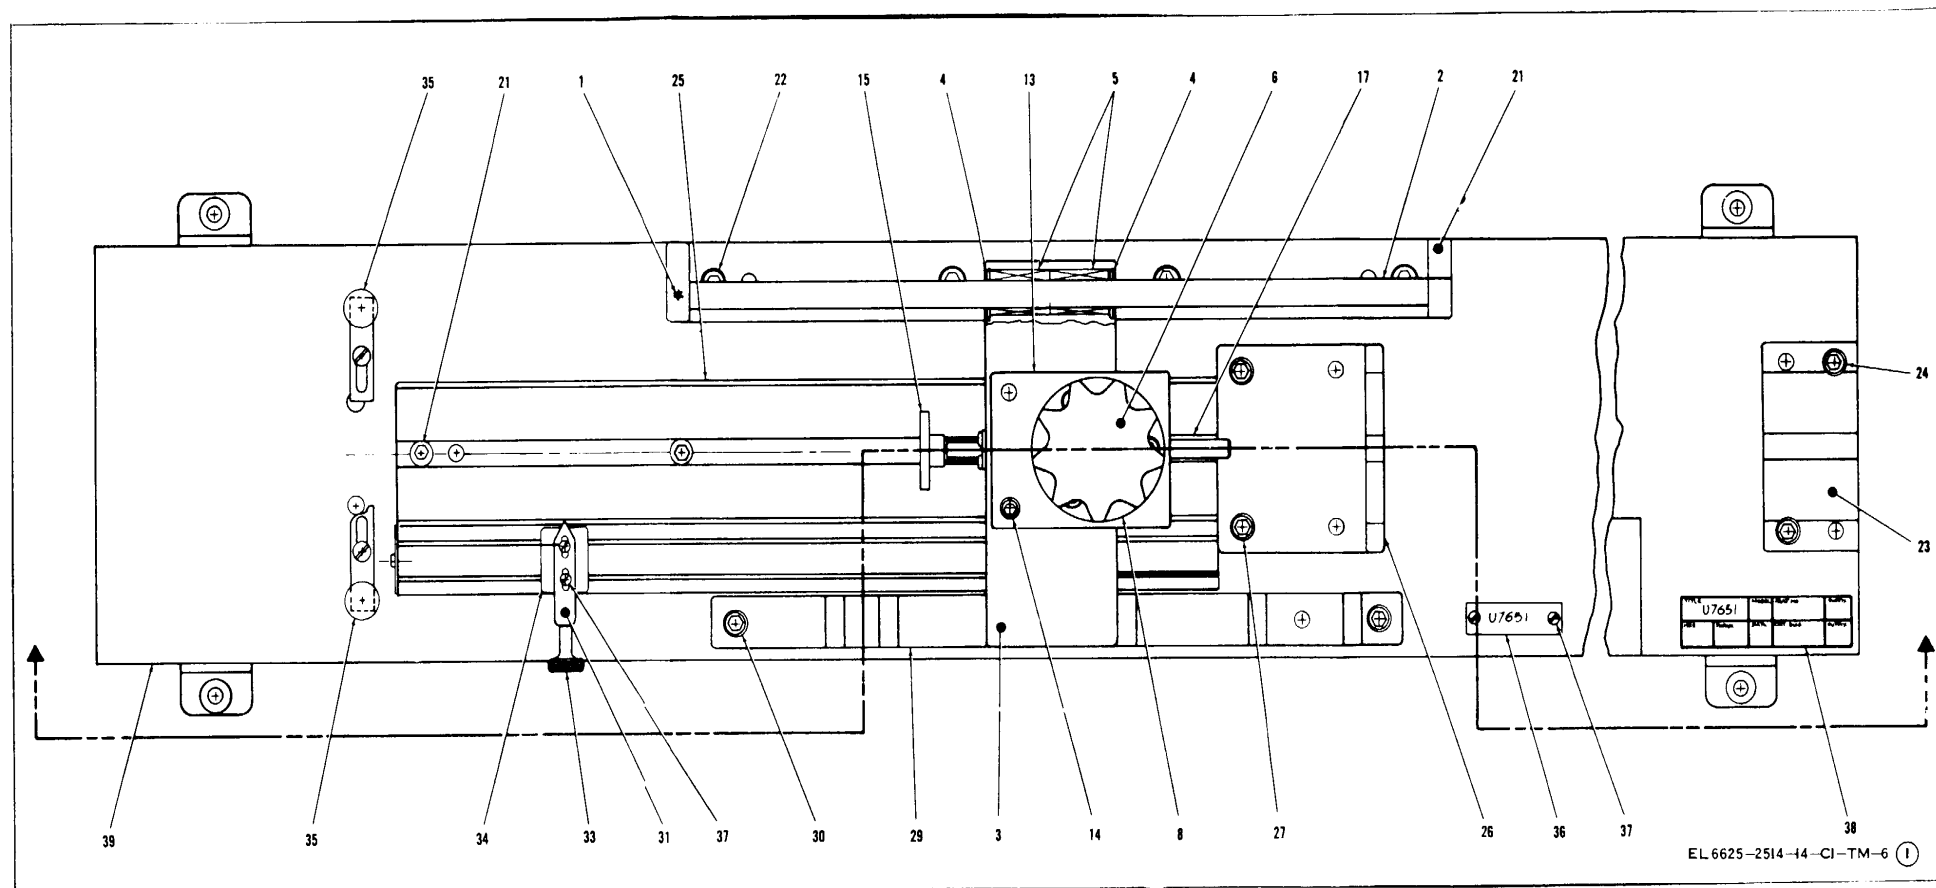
U7651 assembling fixture (sheet 1 of 2)
